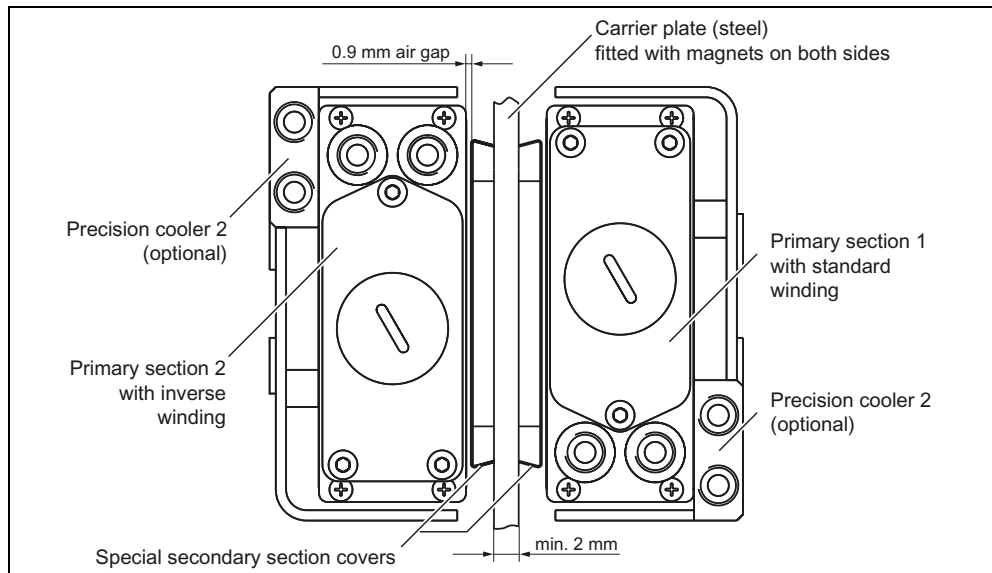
Double-sided motor layout using 1FN3-type peak-load motors
